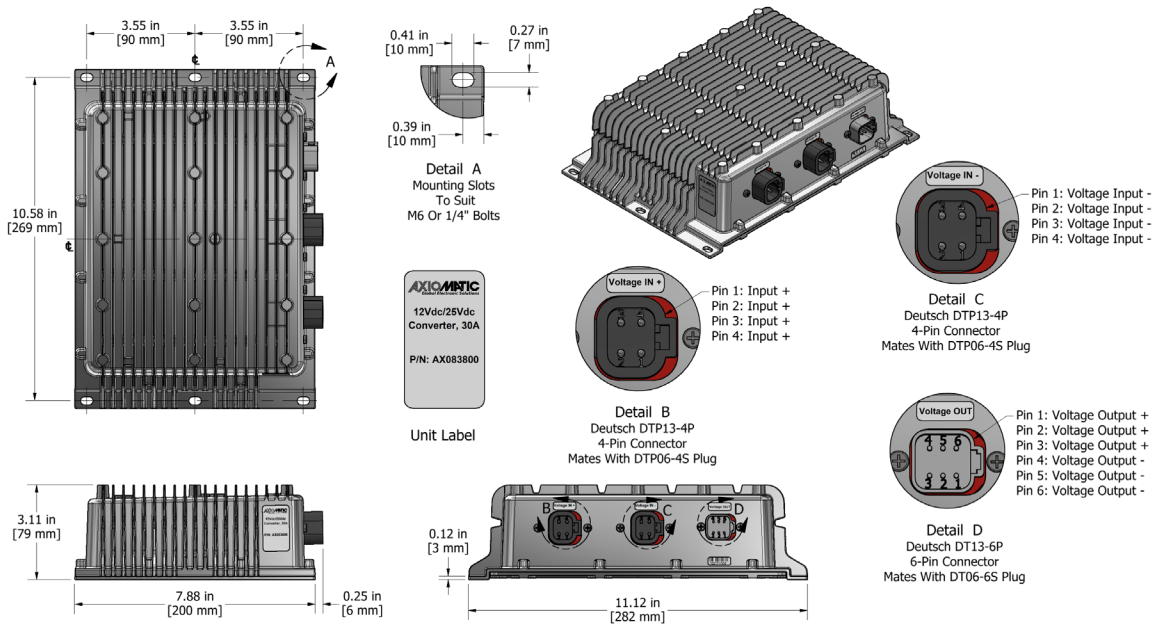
0. – Dimensional Drawing of AX083800 Converter
